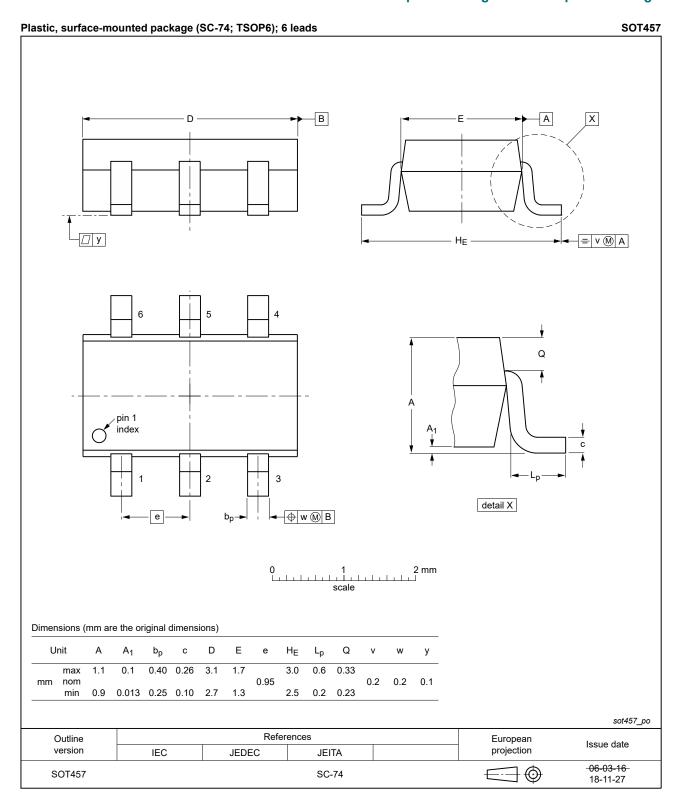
Package outline SOT457 (SC-74; TSOP6)
